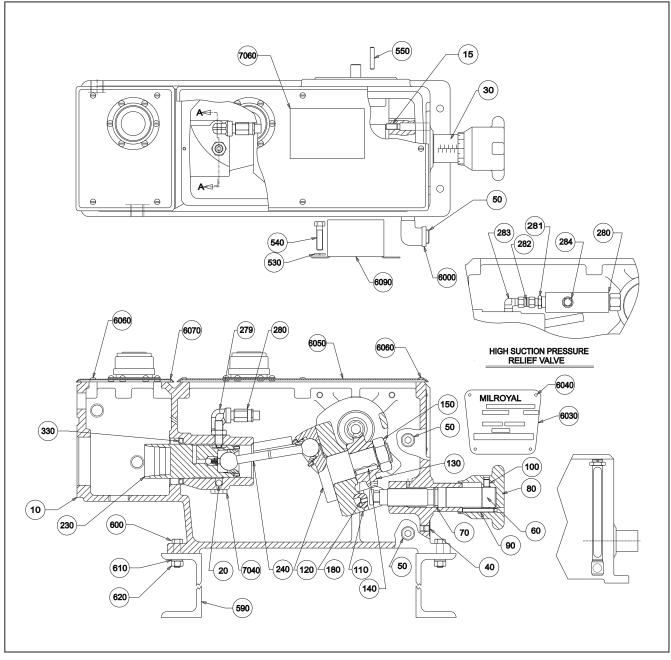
Drive Side and Top Views (DWG 102-2095-000)(Sheet 2 of 2)
